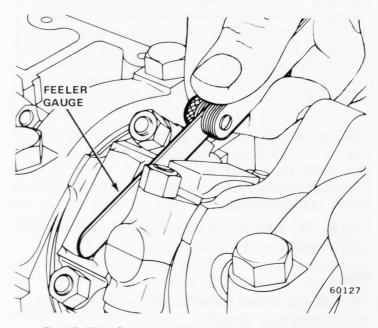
B-154 Connecting Rod Side Clearance Measurement
